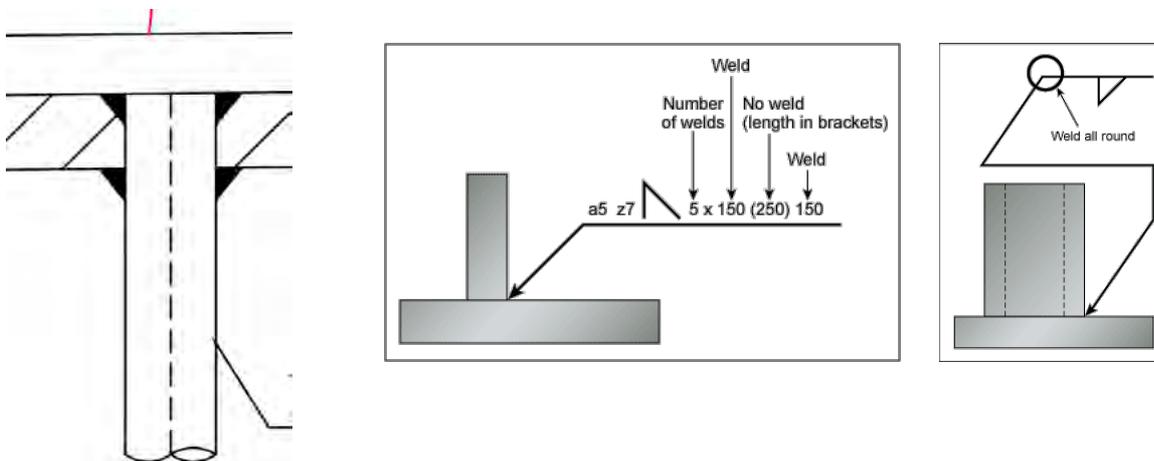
Left: Extract from drawings shown in Appendix 1. Black filled triangles indicate a fillet weld on the upper and lower surface of rod-plate interface. Inserts: show typical expected weld notation.
